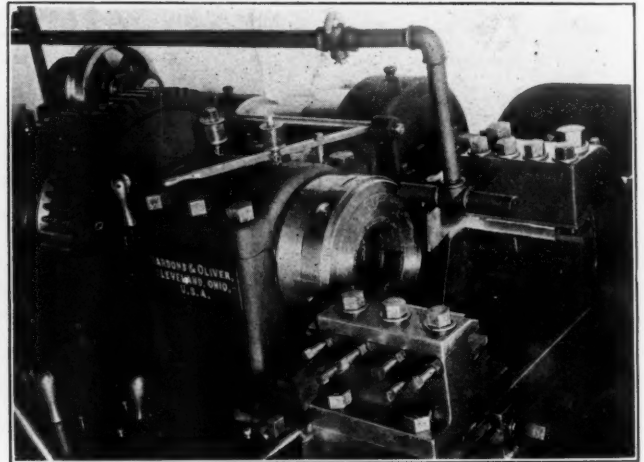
COMBINED FORMING AND CUTTING-OFF TOOL SLIDES.
